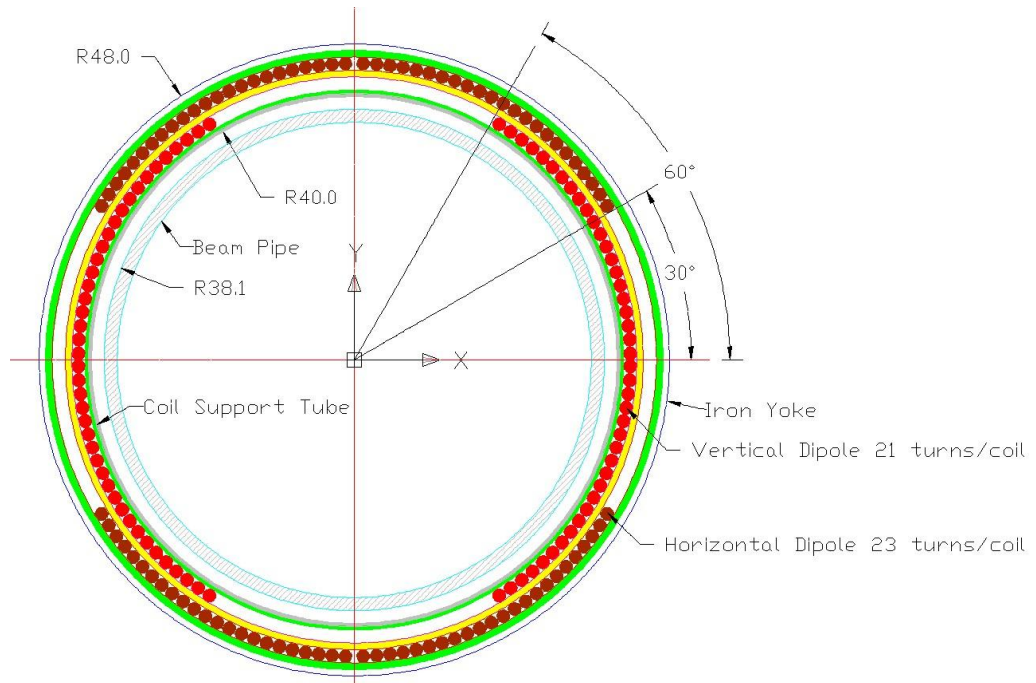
Dipole corrector shell type coils cross-section. Dimensions are in mm.
